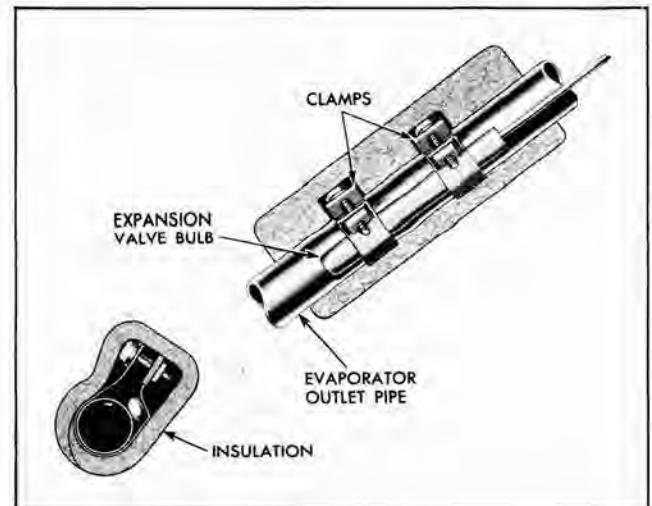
Thermostatic Expansion Valve Bulb at Evaporator Outlet Pipe
